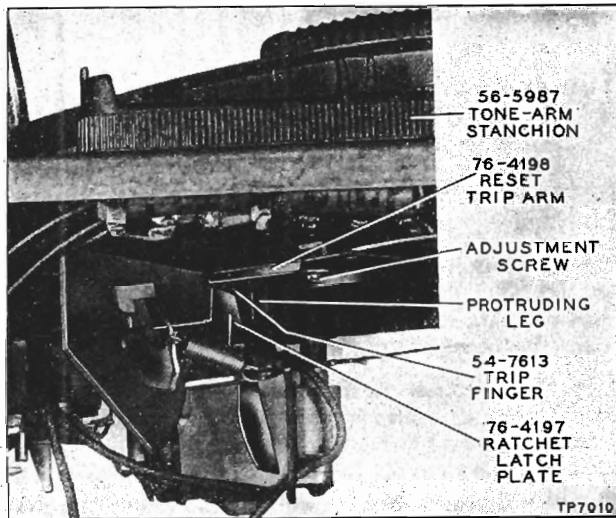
Trip Assembly, Showing Trip Finger Riding Over Ratchet Plate
